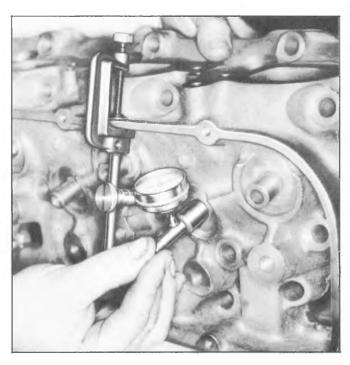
A-25V--Measuring Valve Stem Clearances (Typical)
